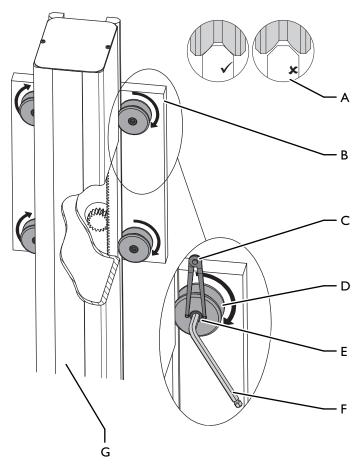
Setting the rollers: Prism guideway, eccentric rollers
